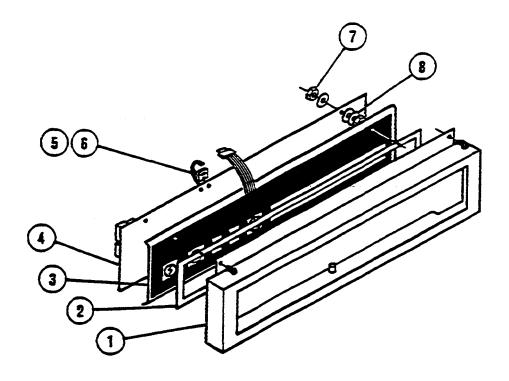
FRONT CONTROL PANEL ASSEMBLY
